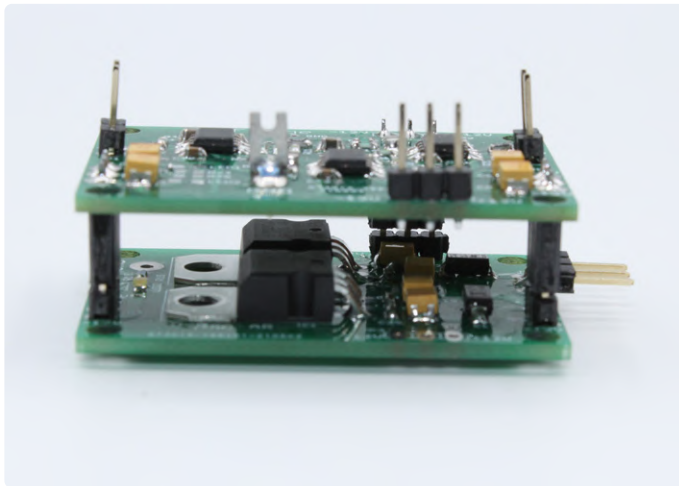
The filter board plugged into a simple board of the same size fitted with voltage regulator ICs.
